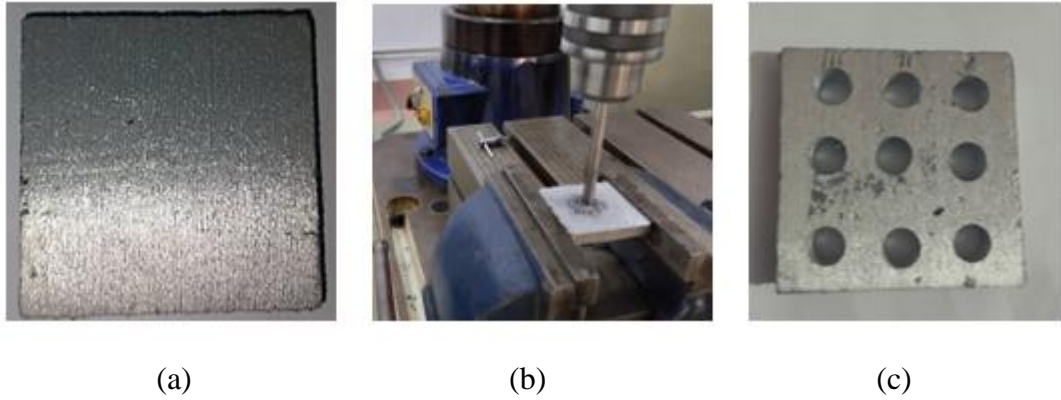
Machining process, a) HMMC specimen work-piece, b) Experimental setup, c) Drilled HMMC specimen.
